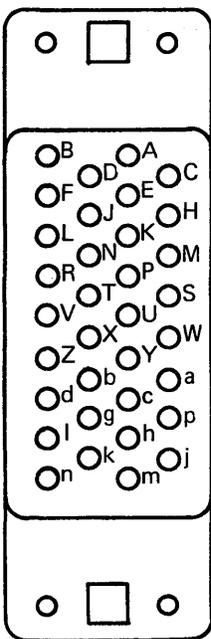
DMP11 Cable Drawings (Sheet 3 of 3)
